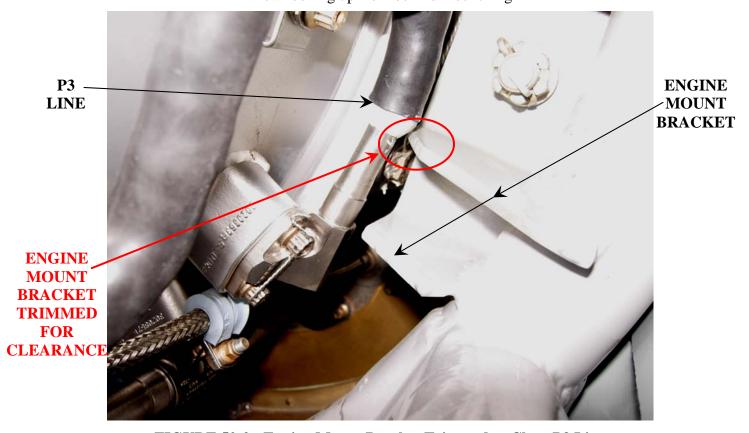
Engine Mount Bracket Trimmed to Clear P3 Line
